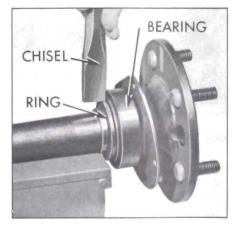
Removing Rear Wheel Bearing Retaining Ring
